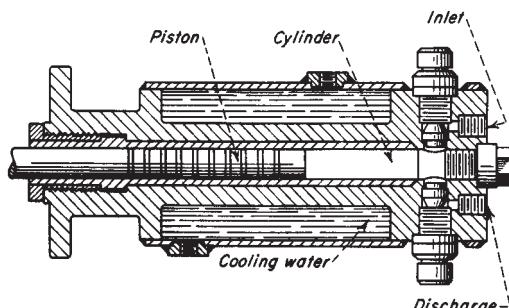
Forged-steel single-acting high-pressure cylinder.
